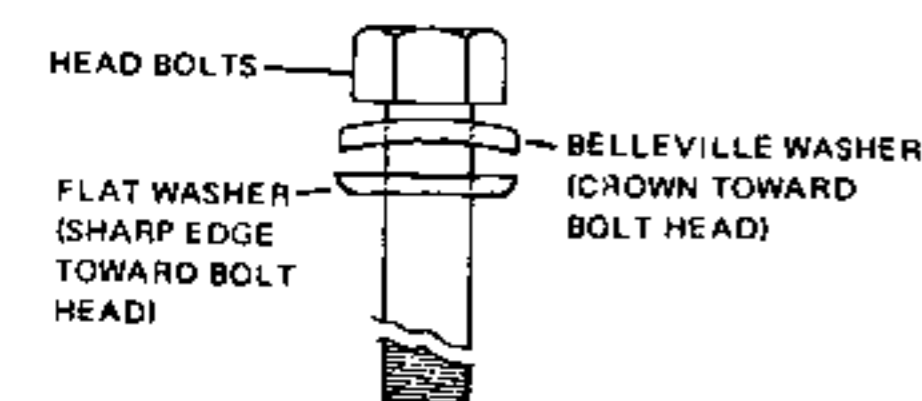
Install Belleville washer and flat washer on cylinder head cap screws as shown.
